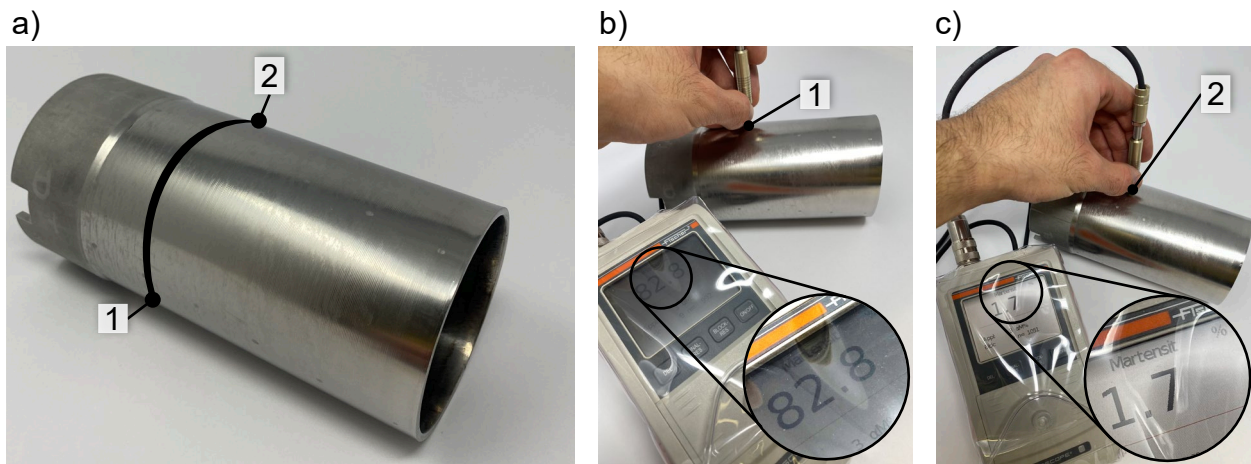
Thermomechanical 2D-Grading: a) produced tube; b)-c) angular measurement points
